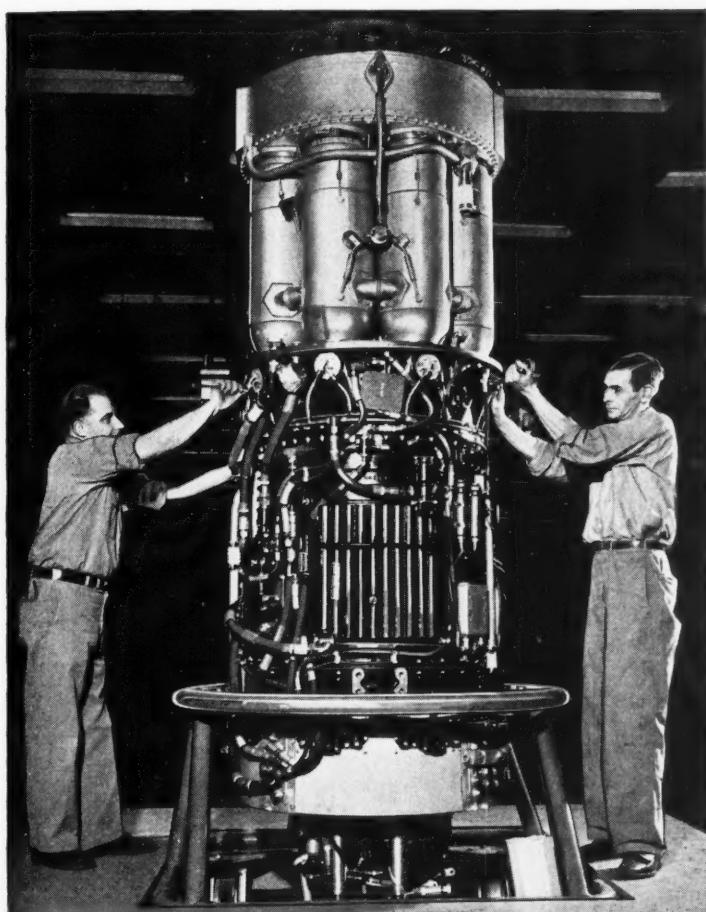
Vertical instead of horizontal assembly of turbo-jet engines permits better alignment between rotating and stationary parts.
